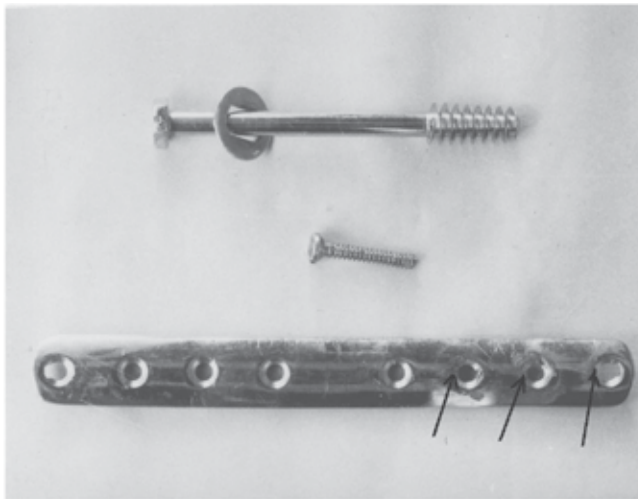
Retrieved bone plate and screws showing corroded screw holes of the plate (arrow)
